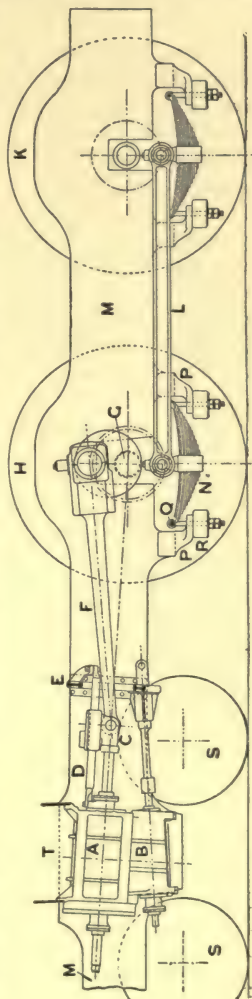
Driving mechanism of a Great Eastern Railway express passenger locomotive.
